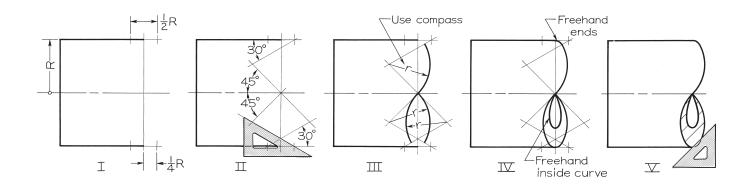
Steps in Drawing S-Breaks for Tubing.
